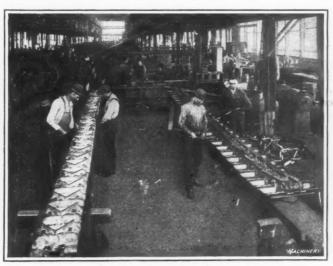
Assembling Tracks for 75-horsepower Tractors
